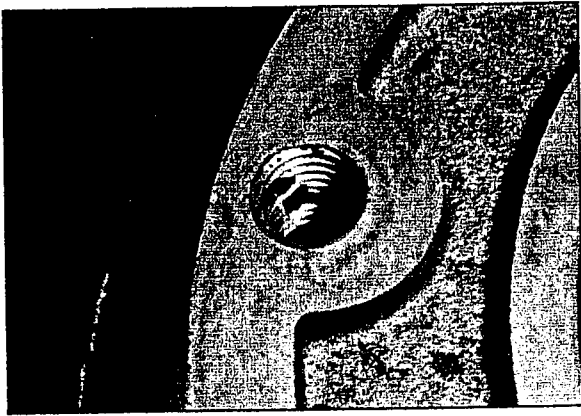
Showing motor adaptor with sections of brake unit casing.
